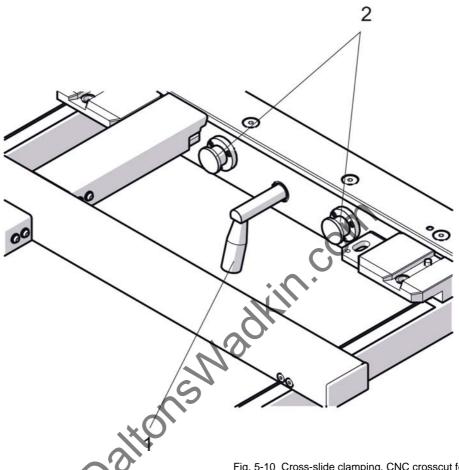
Cross-slide clamping, CNC crosscut fence DUO
